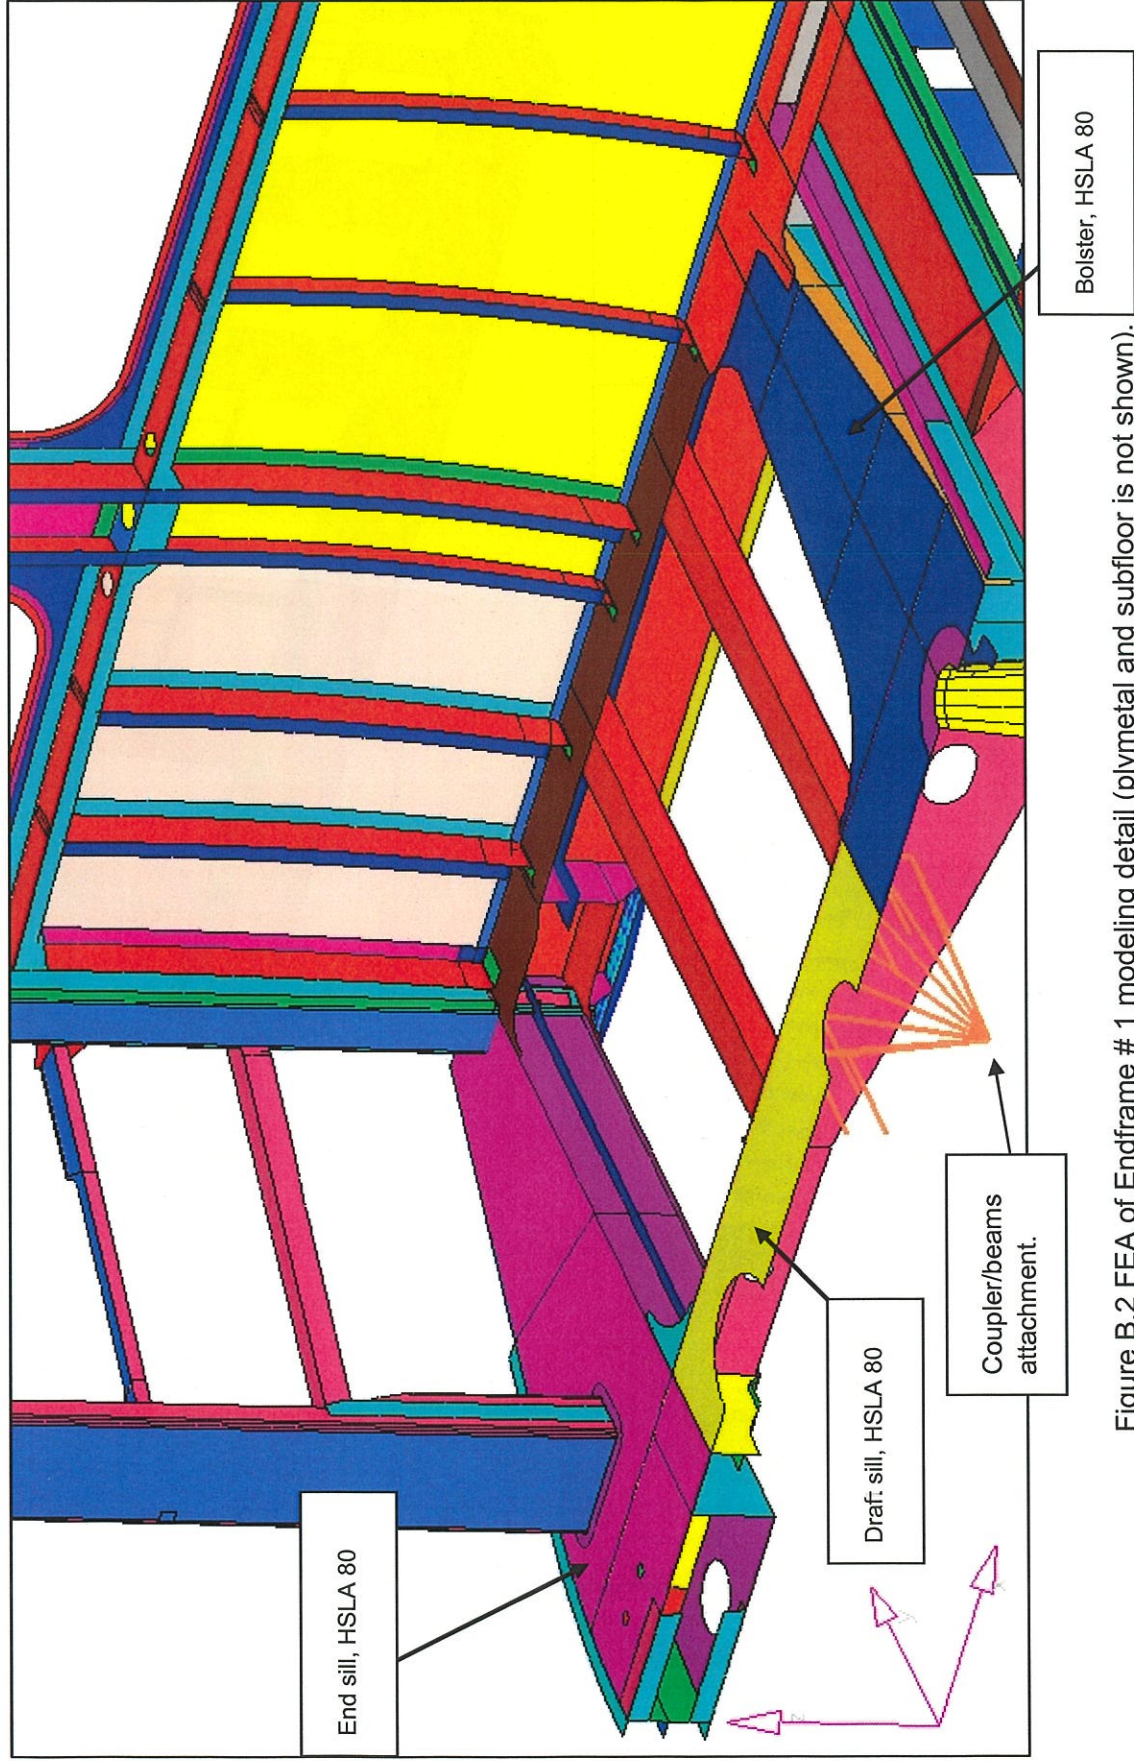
FEA of Endframe # 1 modeling detail (plymetal and subfloor is not shown).
